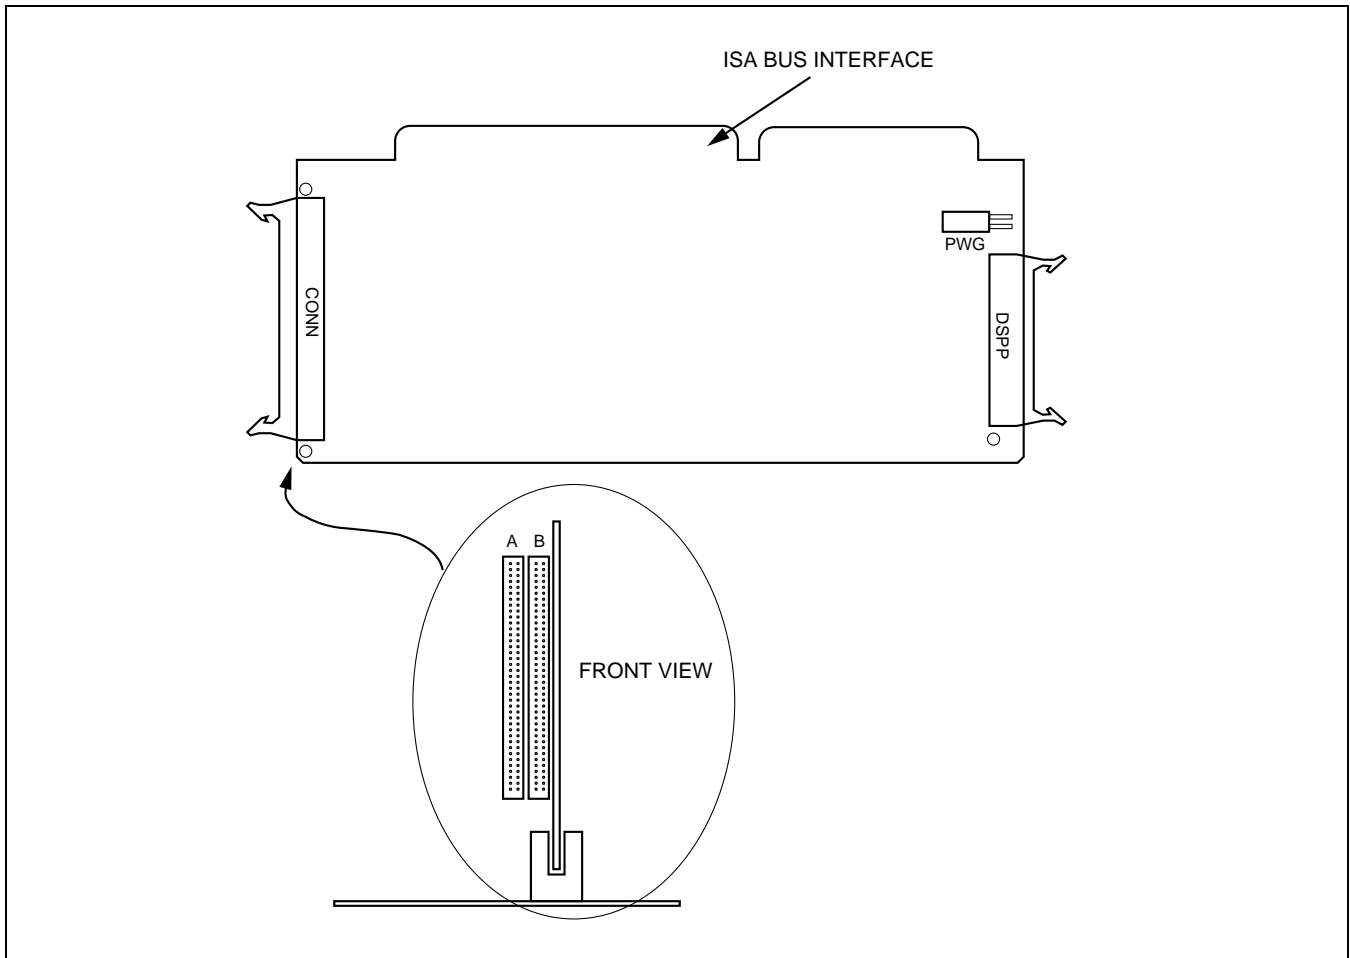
Face Layout of PZ-GT16 (ISAGT)
